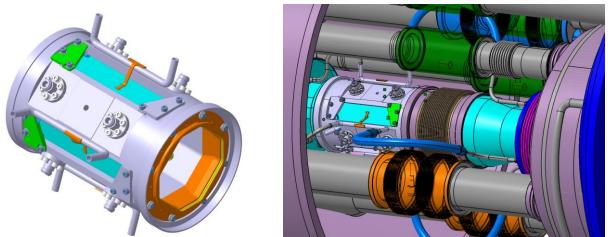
Design and integration of a cryogenic, tungsten-shielded, directional coupler BPM for HL-LHC.
